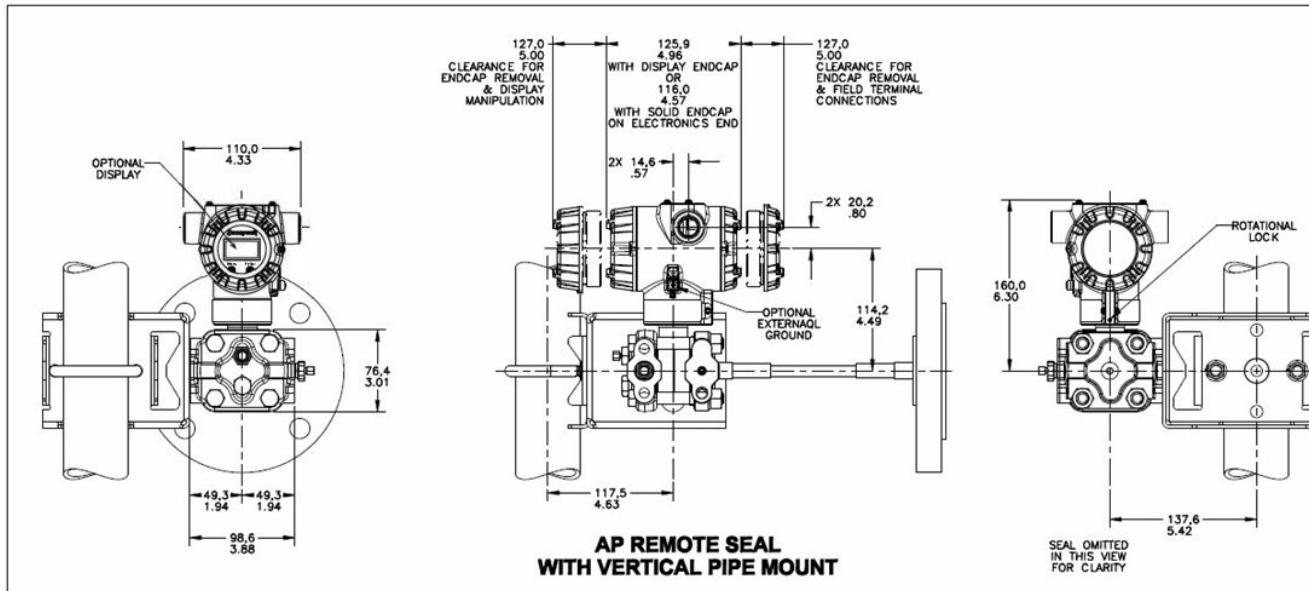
Approximate vertical mounting dimensions for Remote Seal Transmitter
